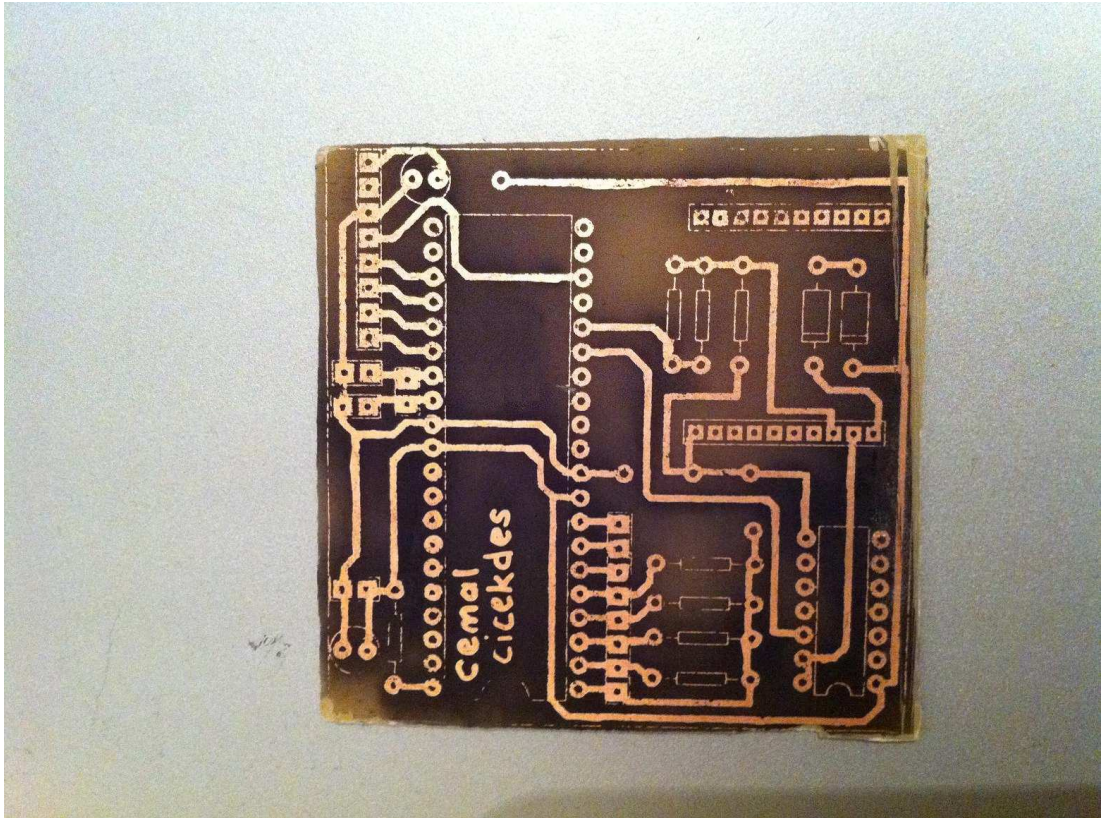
PCB of the remote controller device. It is created using toner transfer method and etching.
